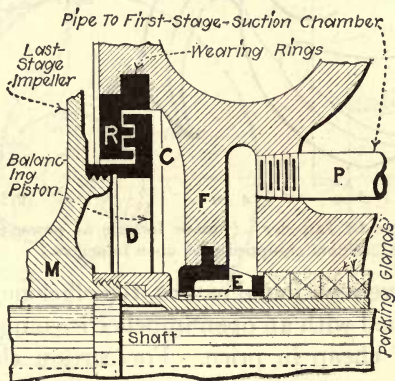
Piston, Or Automatic, Balancing System For Centrifugal Pumps. (De Laval Steam Turbine Co.)
